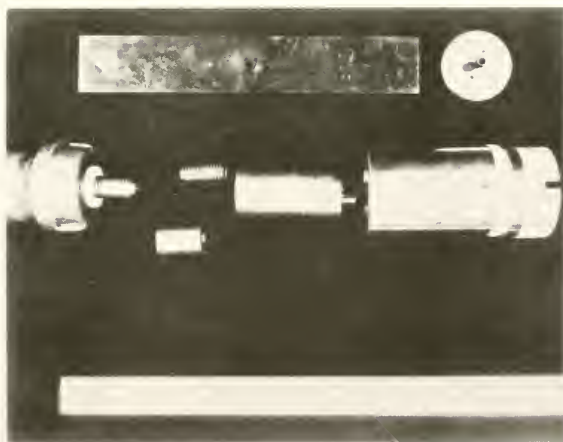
Pre-assembled view of components required to epoxy holder mount extension. Bushing aligns holder mount extension (knurled) with previously epoxied holder mount.
